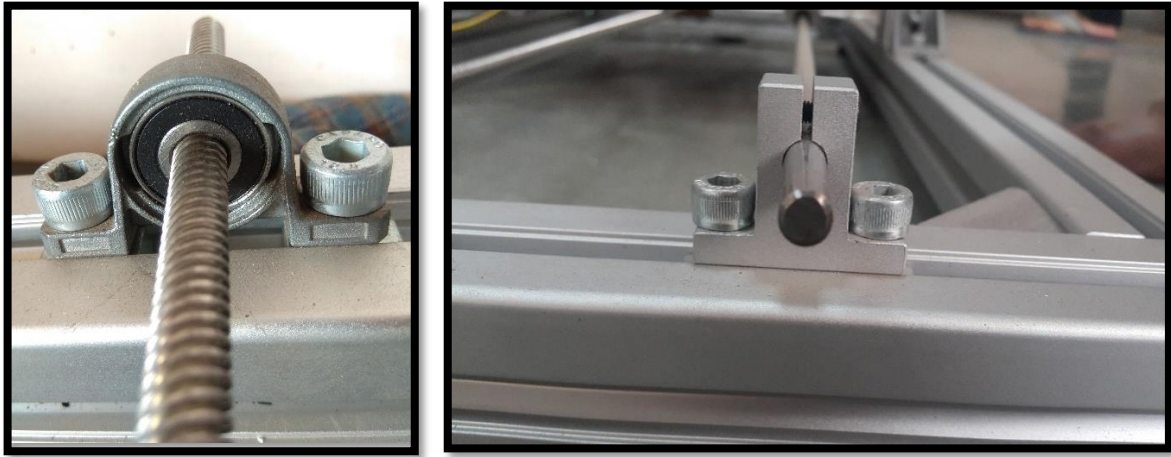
Leadscrew Mounted on Pedestal bearing (Left) and smooth rod guideway (Right)
